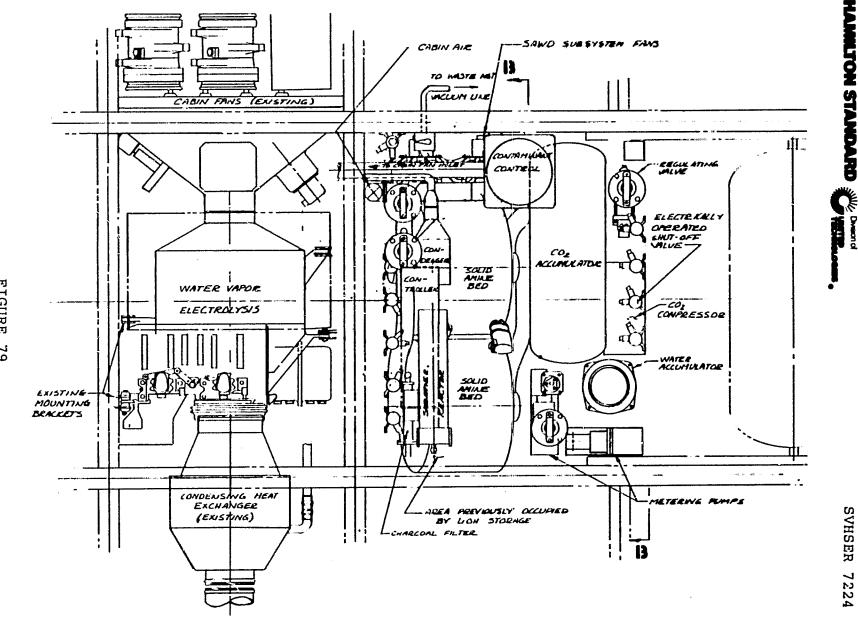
LARS INSTALLATION DRAWING (SHEET 1)
